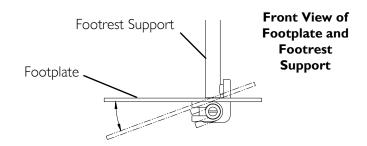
Adjusting Depth on Adjustable Angle Flip-Up - Adjusting Angle on Adjustable Angle Flip-up Footplate
